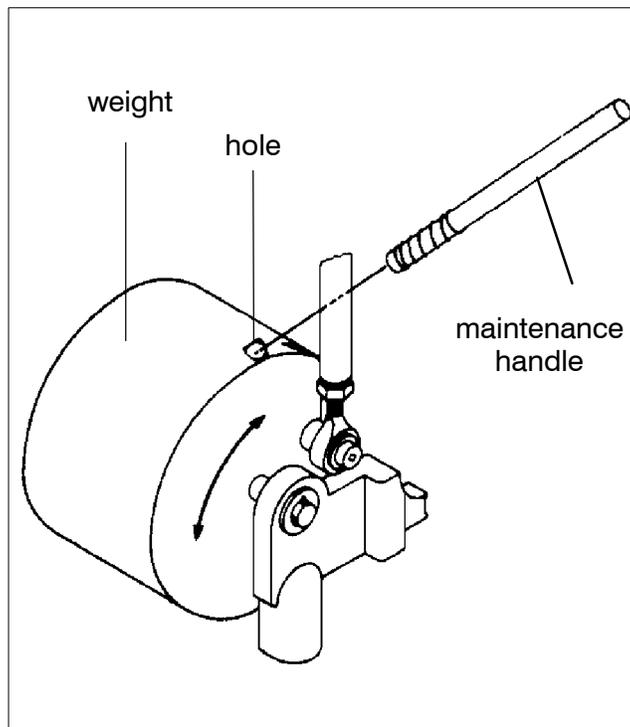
Removable maintenance handle on 4000 amp. F-design transfer switch.
